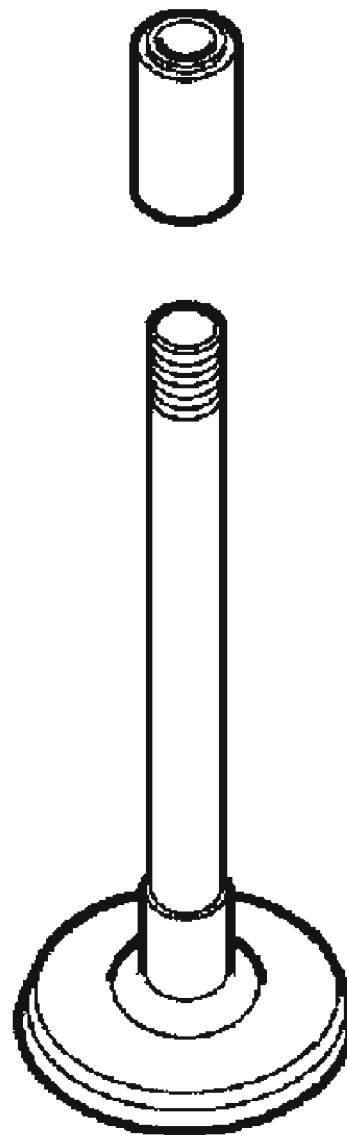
Installing Valve Stem Seal Installation Sleeve
